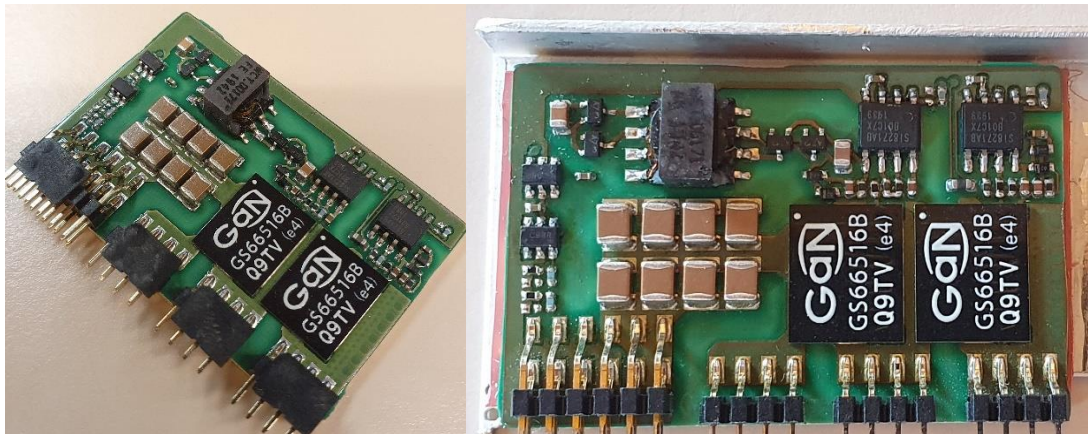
Tested prototype – Insulated metal substrate board with GaN (GS66516B) half-bridge and insulated gate drivers after SMT assembly (left), assembled to the aluminum heatsink (right)
